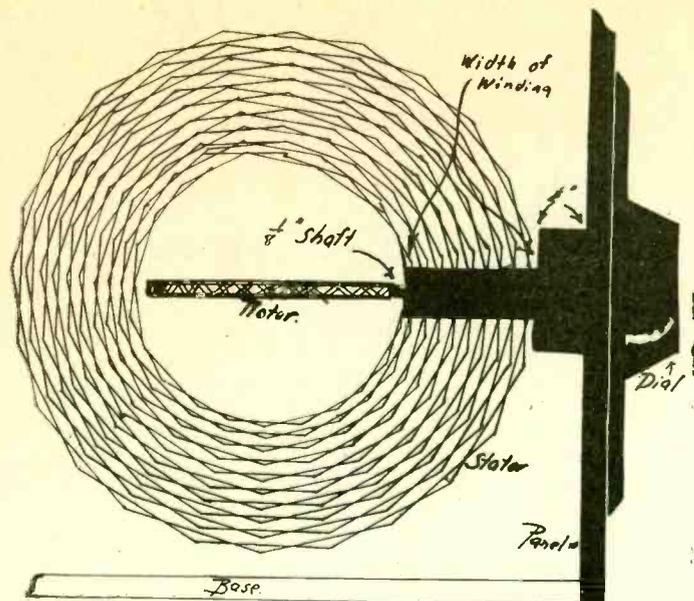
Side view of Byrt C. Caldwell's low-loss coupler, showing position of the windings and shaft. The rotor, shown edgewise, just clears the fixed primary winding. Care should be taken to wind the secondary just small enough to pass the primary winding without touching. It is essential that the latter be held firmly.
